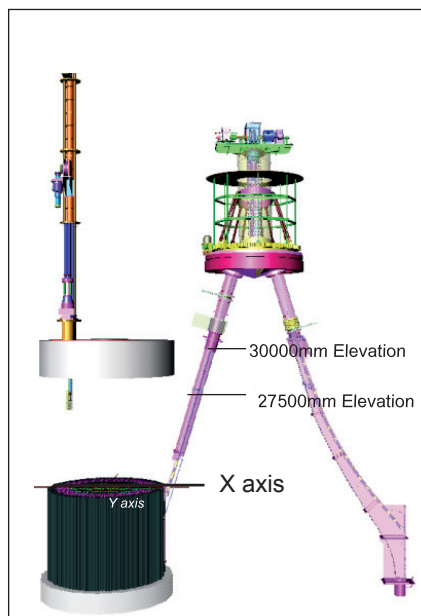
Core, transfer arm and Inclined fuel transfer machine models
